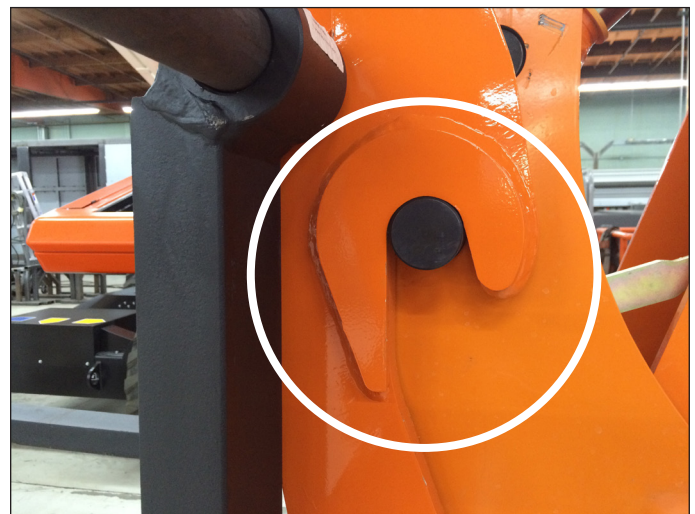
Raise Boom Until Pivot Pins (A) Are Fully Seated in Attachment Hooks (B)
